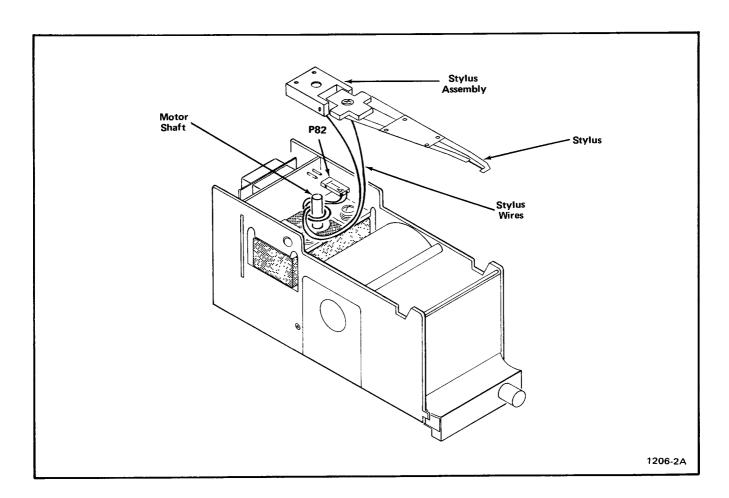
Correct alignment of stylus assembly connecting wire.
